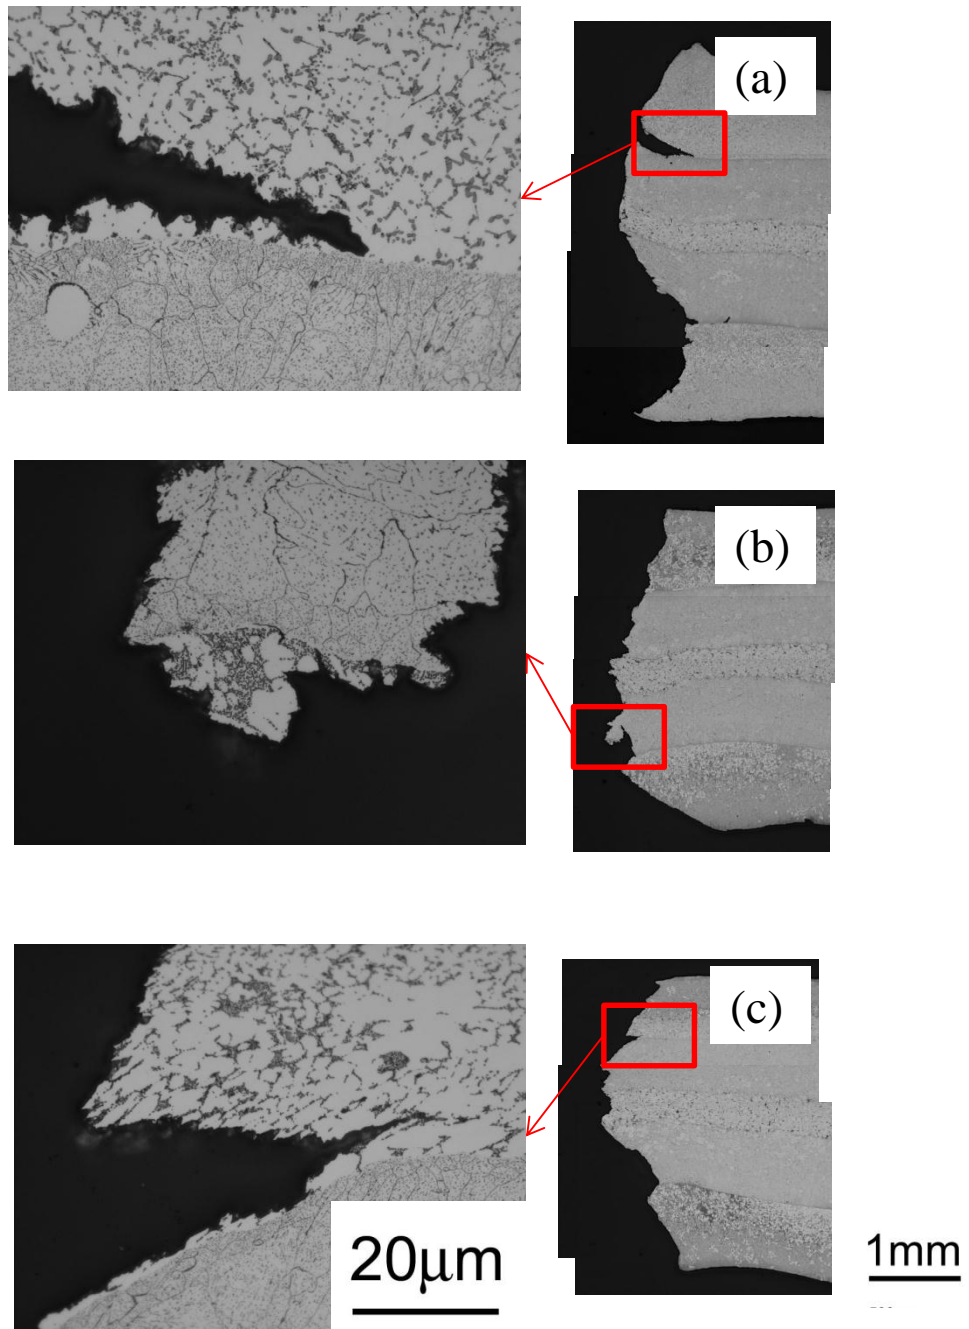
Macro- and Microstructure of the cross section of the fractured by tensile tests with different initial load before casting. (a): 0.5kN, (b): 1.1kN, (c): 8.8kN.
